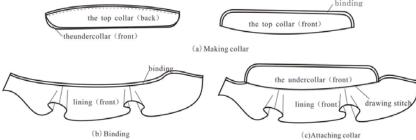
Detachable collar sewing craftsmanship.(a) Making collar;(b)Binding;(c)Attaching collar
